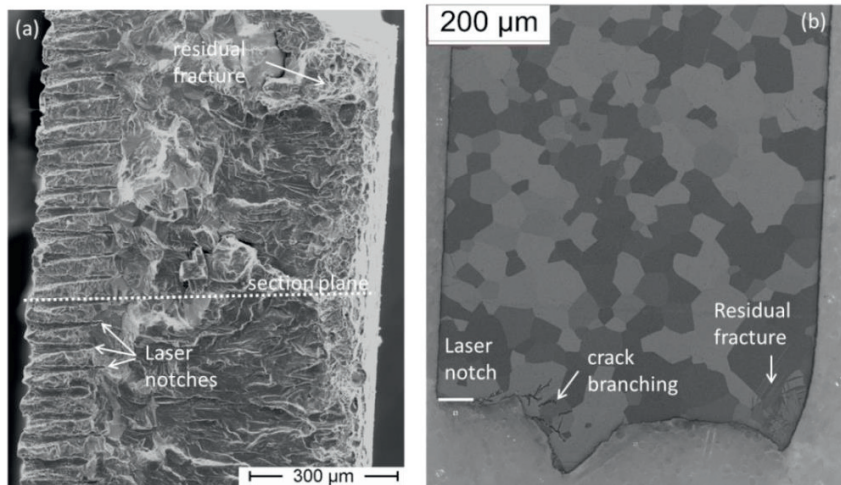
Fracture Surface (a) and microsection (b) of specimen B (laser structured L2)
